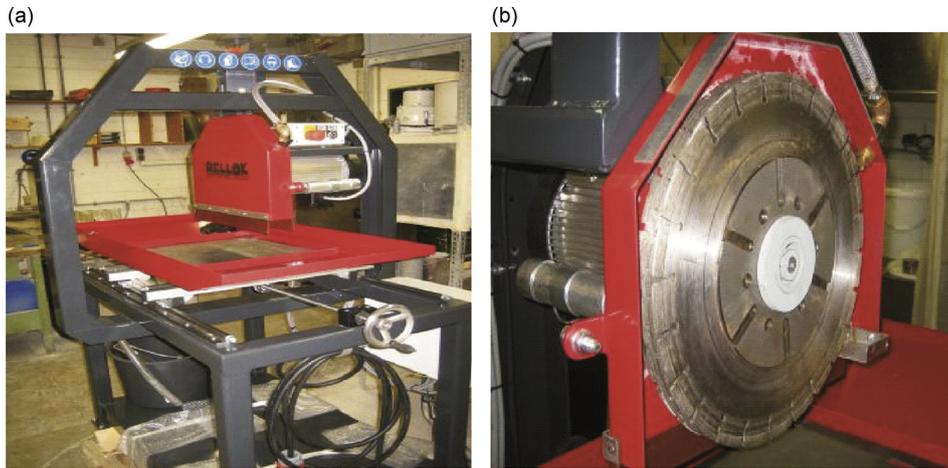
Laboratory grinding machine. (a) Bench. (b) Machine.
